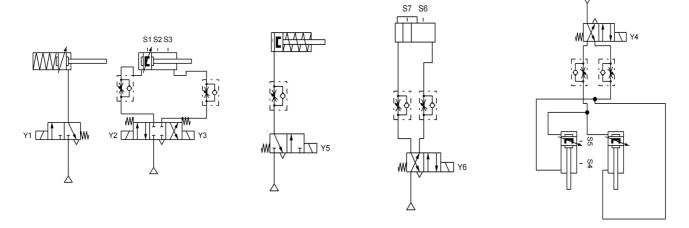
Pneumatic scheme of the machine for stacking bottles
